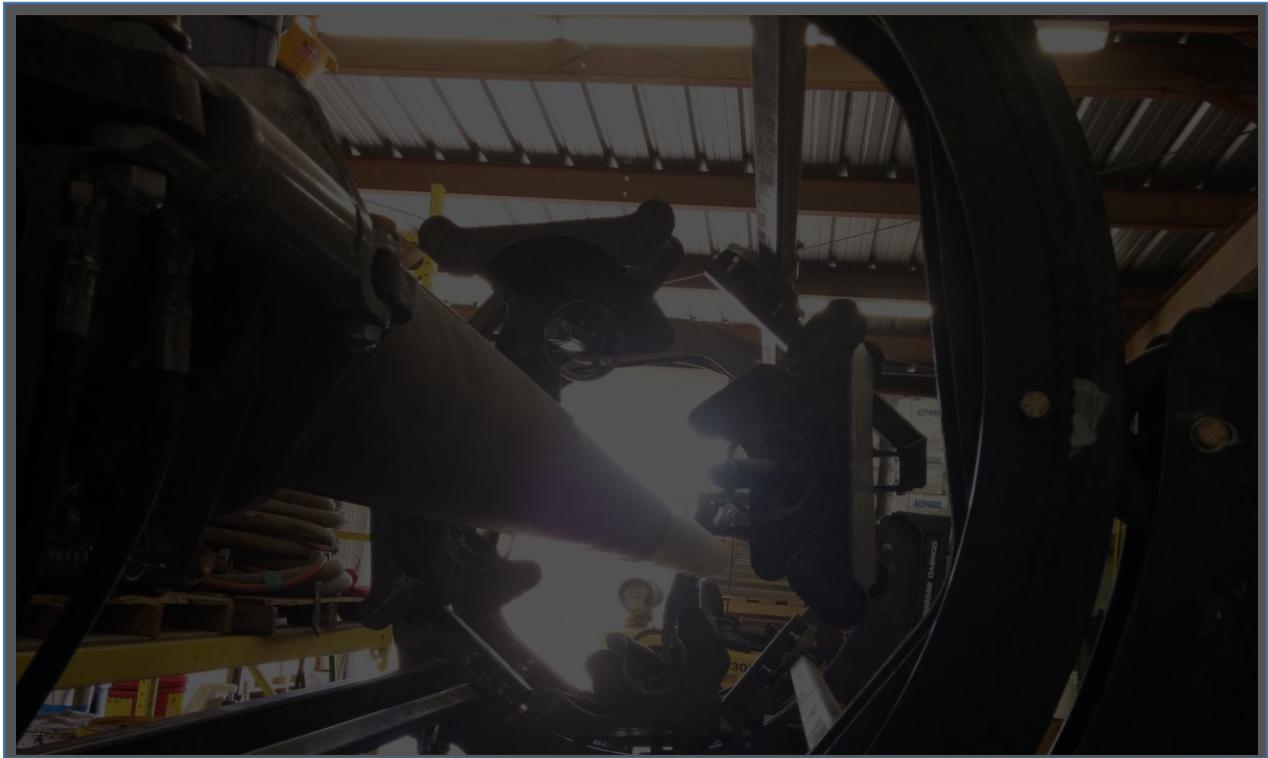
First Prototype of the MMU (Mobile Manufacturing Unit) InfinitPipe®
